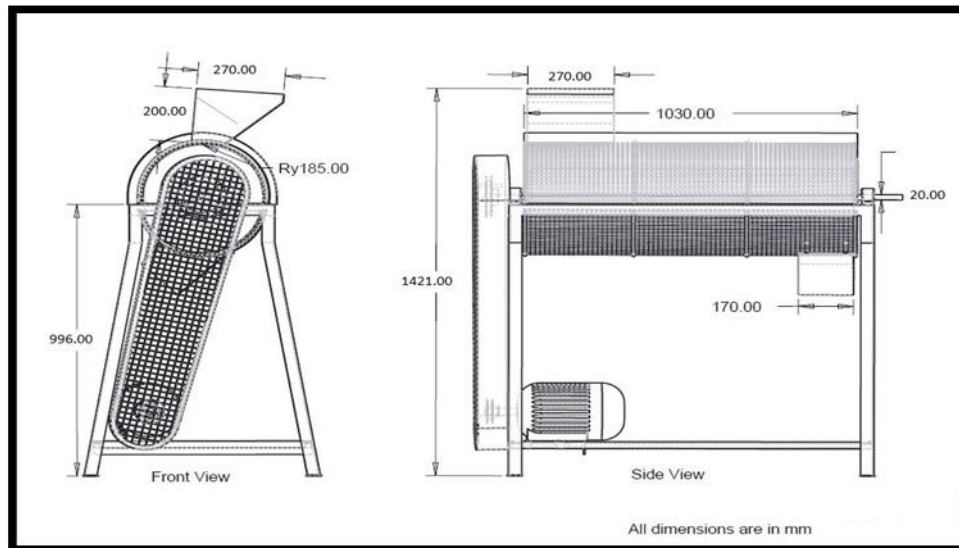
Schematic view of developed arecanut husk fibre extraction machine
